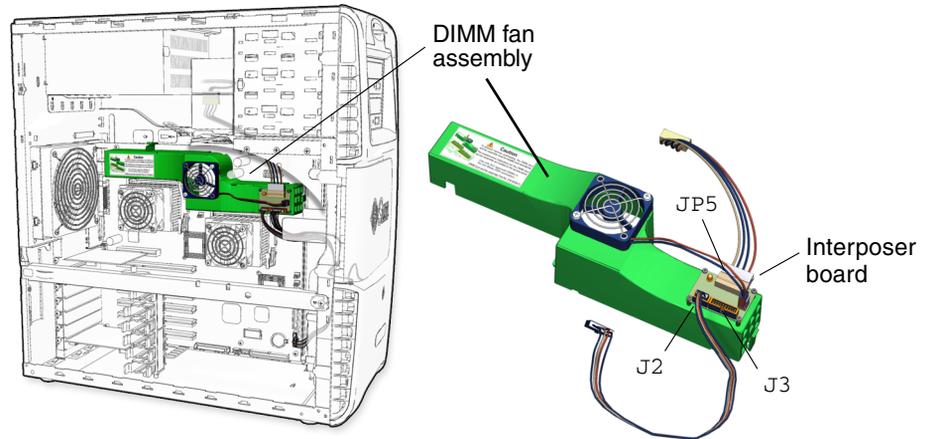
DIMM Fan Assembly Location and Identification
